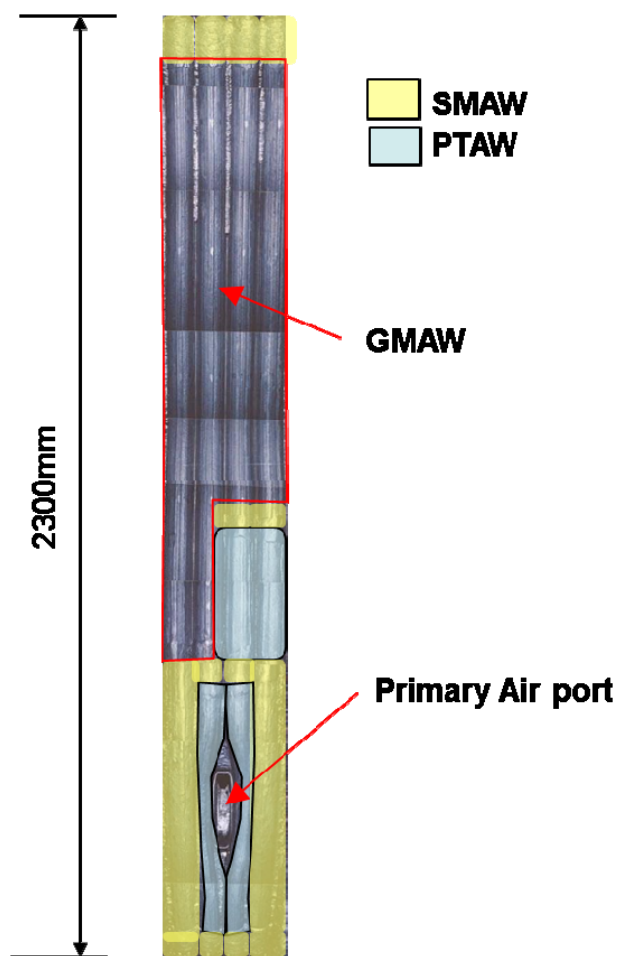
Appearance of the 25%Cr overlay welded test panel
